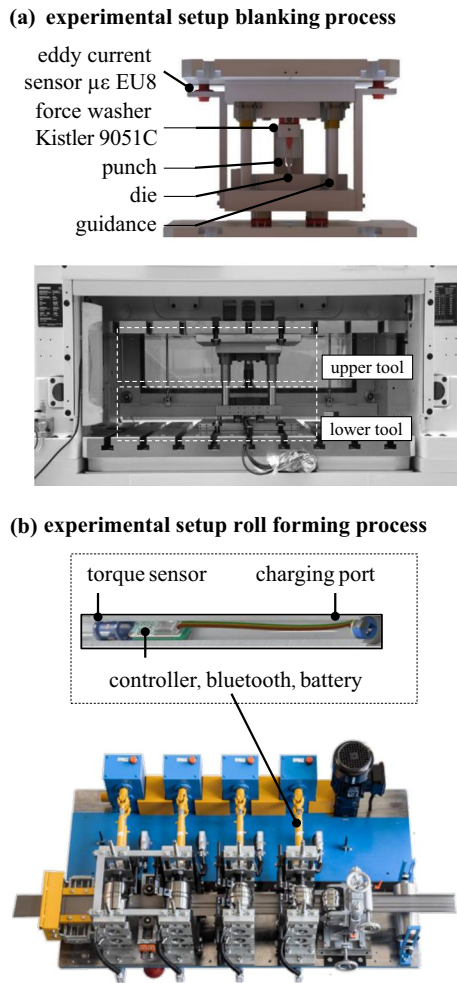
Experimental set up of the blanking tool (a) [15] and the sensorial equipped roll forming line (b) [59]
